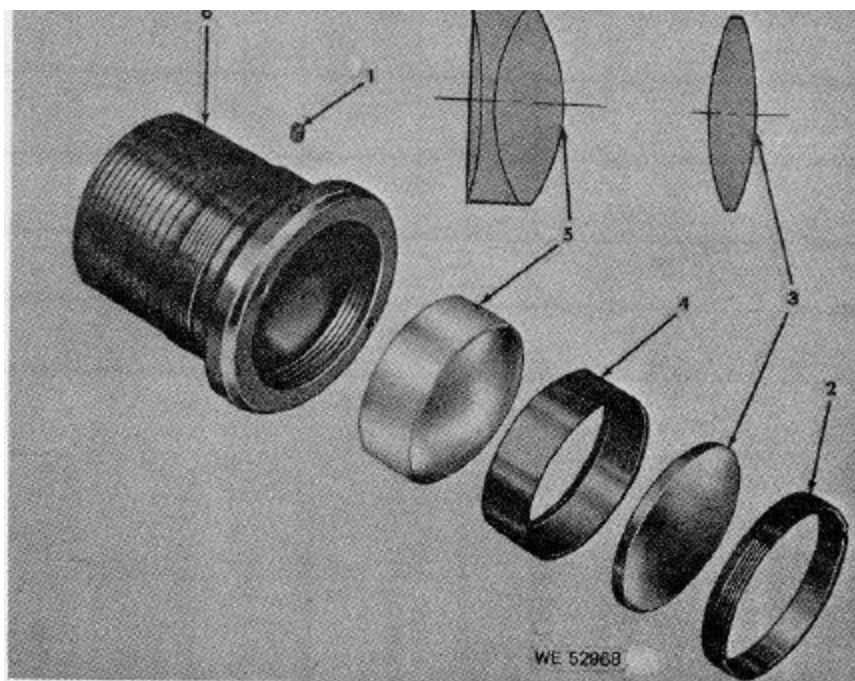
Cell, eyepiece assembly 7687265 (M12A7K) -exploded view.
